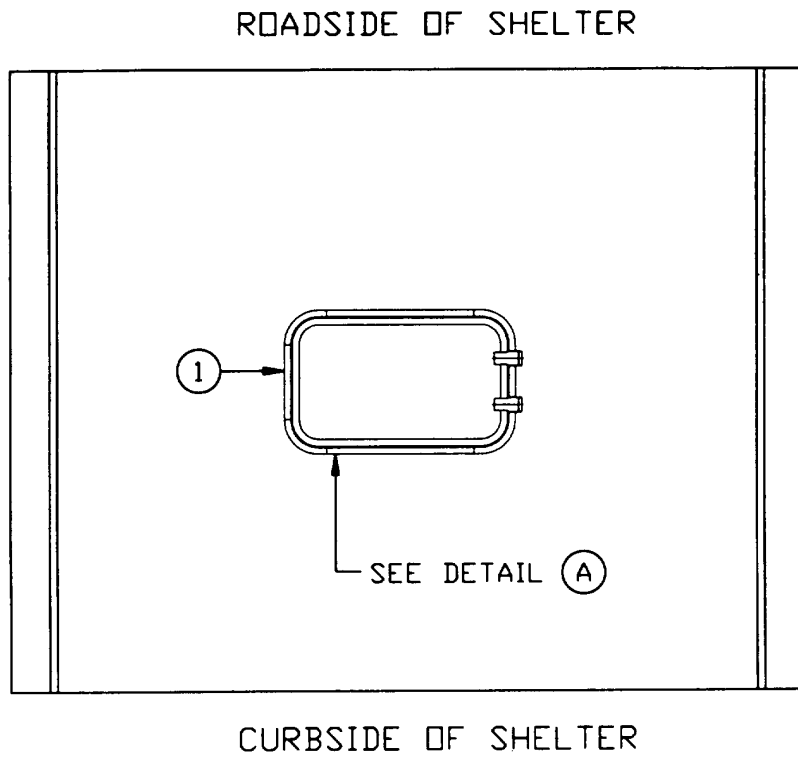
ESCAPE HATCH ASSEMBLY (SHEET 1 OF 2)
